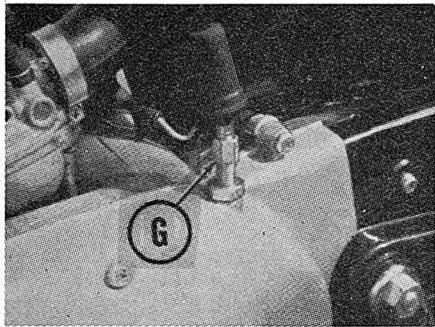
Clutch hand lever (cable) free play is adjusted by turning cable guide (G).
